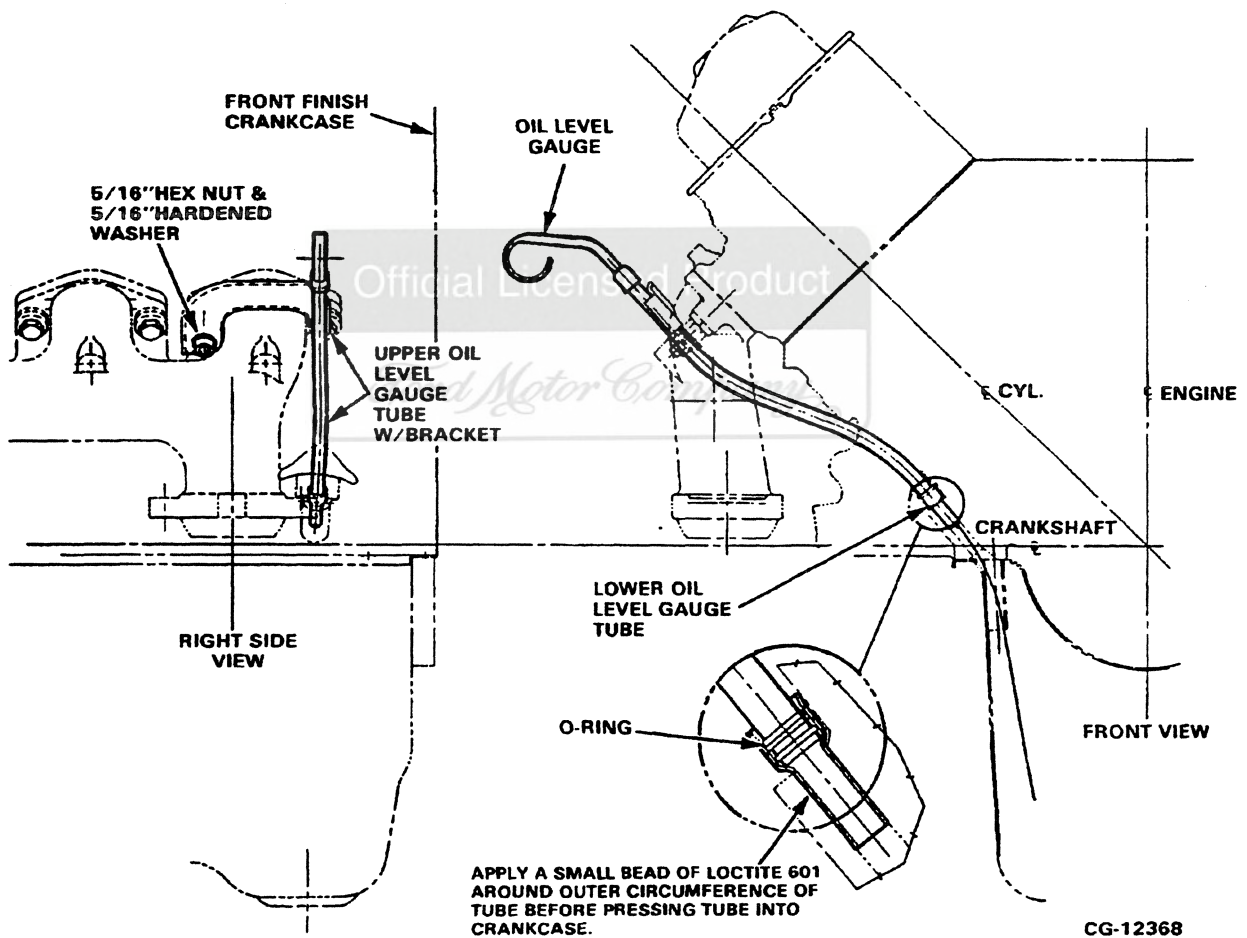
Oil Level Gauge Tube Assembly (Removal & Reassembly)
